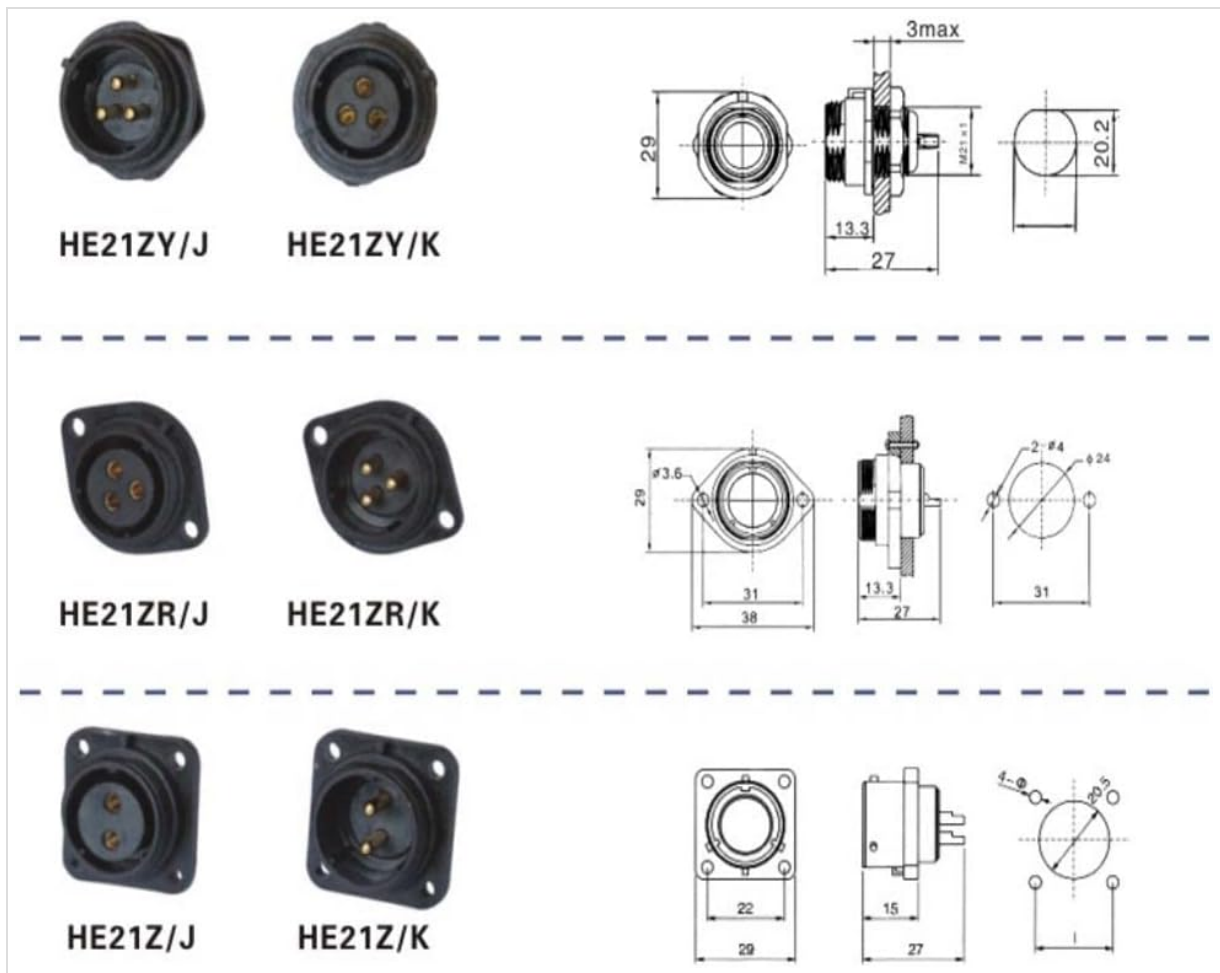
Technical drawings showing various panel mount configurations (HE21ZY/J, HE21ZR/J, HE21Z/J) with their respective dimensions and mounting hole patterns.
